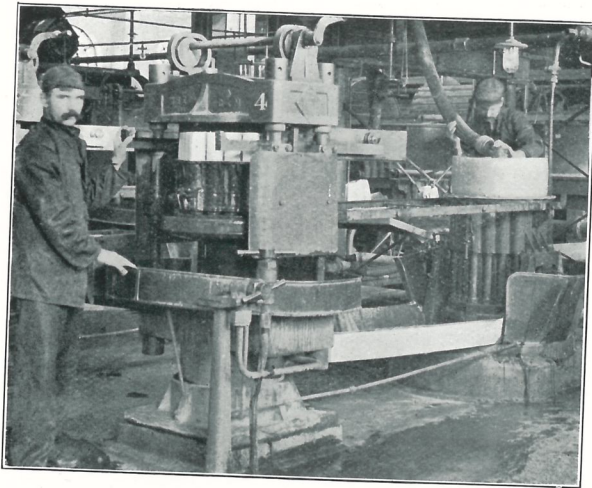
MOULDING MACHINE. WALTHAM ABBEY.
